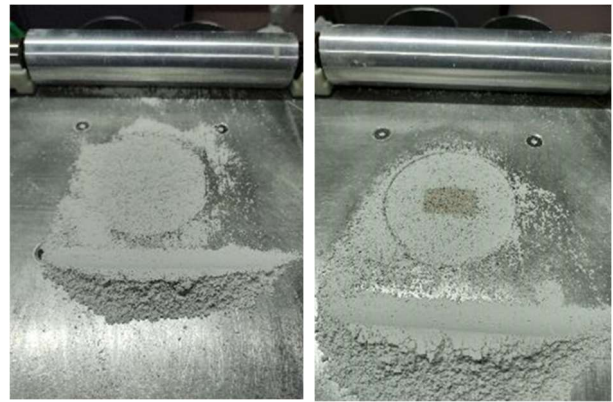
Printing by the binder jetting process with the PC3Ad mixture
